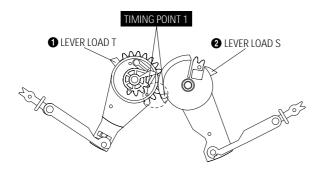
Gear Loading Drive, Slider Cam, Lever T, S Load Ass'y Removal
